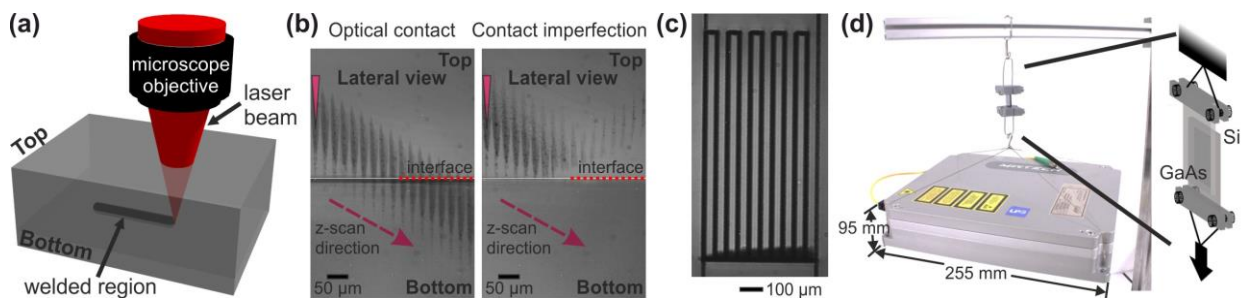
(a) Scheme of the laser welding procedure. (b) Lateral view by IR transmission microscopy of the Si-Si interface. Imperfect contact leads to faulty welding. (c) IR transmission image of a welded serpentine in the Si-GaAs configuration. (d) Image of the laser source used in the experiments (~ 3 kg) hanging from a Si wafer welded on GaAs. A scheme is shown on the right.
